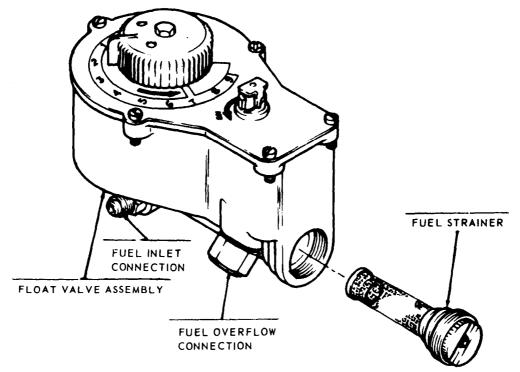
Float valve (Type II and Type I with Conversion Kit installed).
